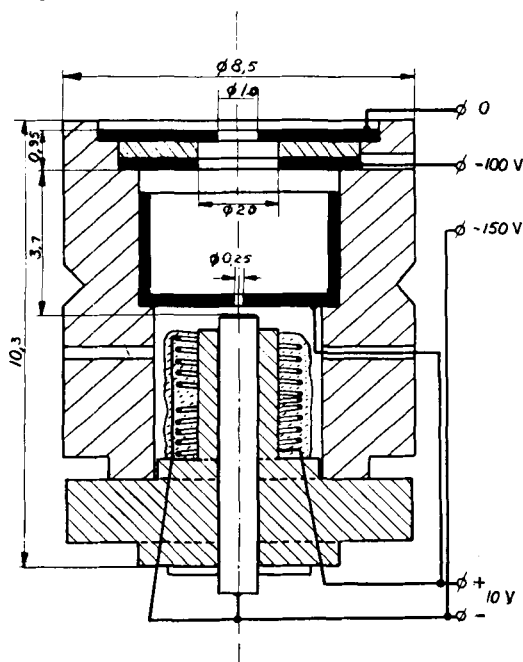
Construction of the electron gun. (Dimensions in millimeters.)
